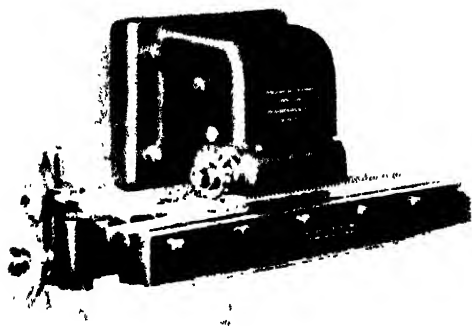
The rack milling attachment. (*The Brown & Sharpe Manufacturing Company*)
